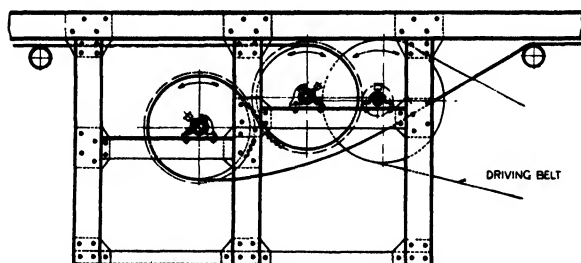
Tandem Drive on Return Run of Conveyor.
